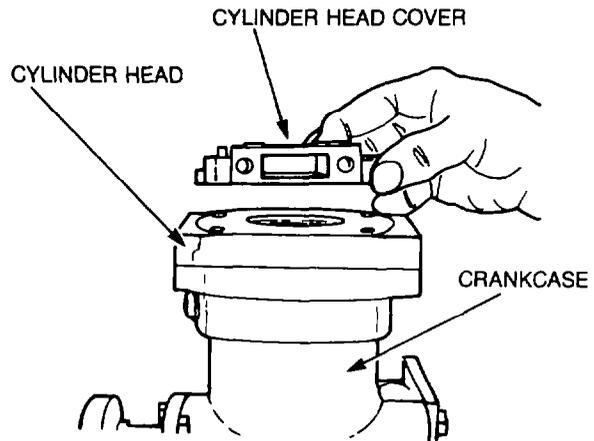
Cylinder Head Cover and Cylinder Head — Removal
